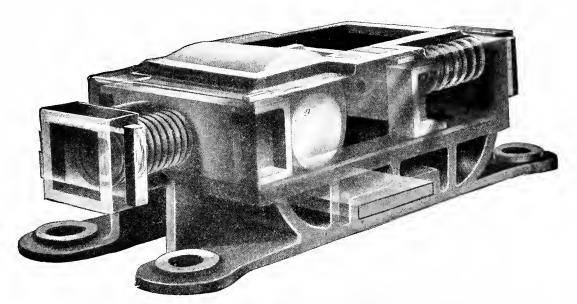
Joliet Single Roller Side Bearing. Joliet Railway Supply Company.
